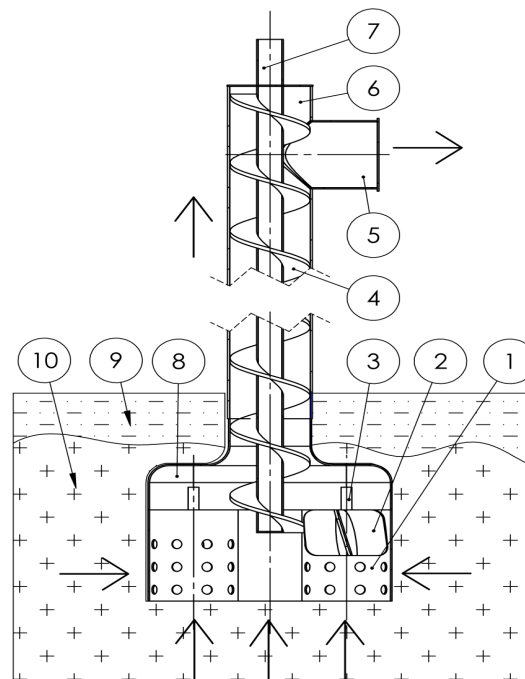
Intake node of sapropel mining equipment: 1 – inlet channel; 2 – propeller; 3 – drive shaft; 4 – screw conveyor; 5 – exhaust channel; 6 – vertical pipe; 7 – drive shaft of screw conveyor; 8 – inlet dome; 9 – water; 10 – sapropel layer
